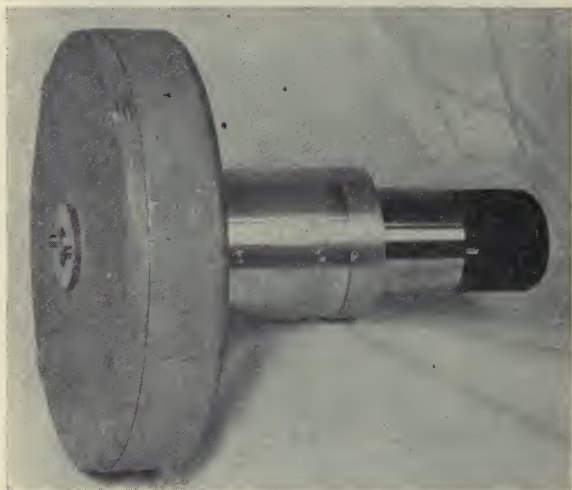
Complete scanning drum and flywheel assembly, including optical subassembly under cap at end of scanning drum.
